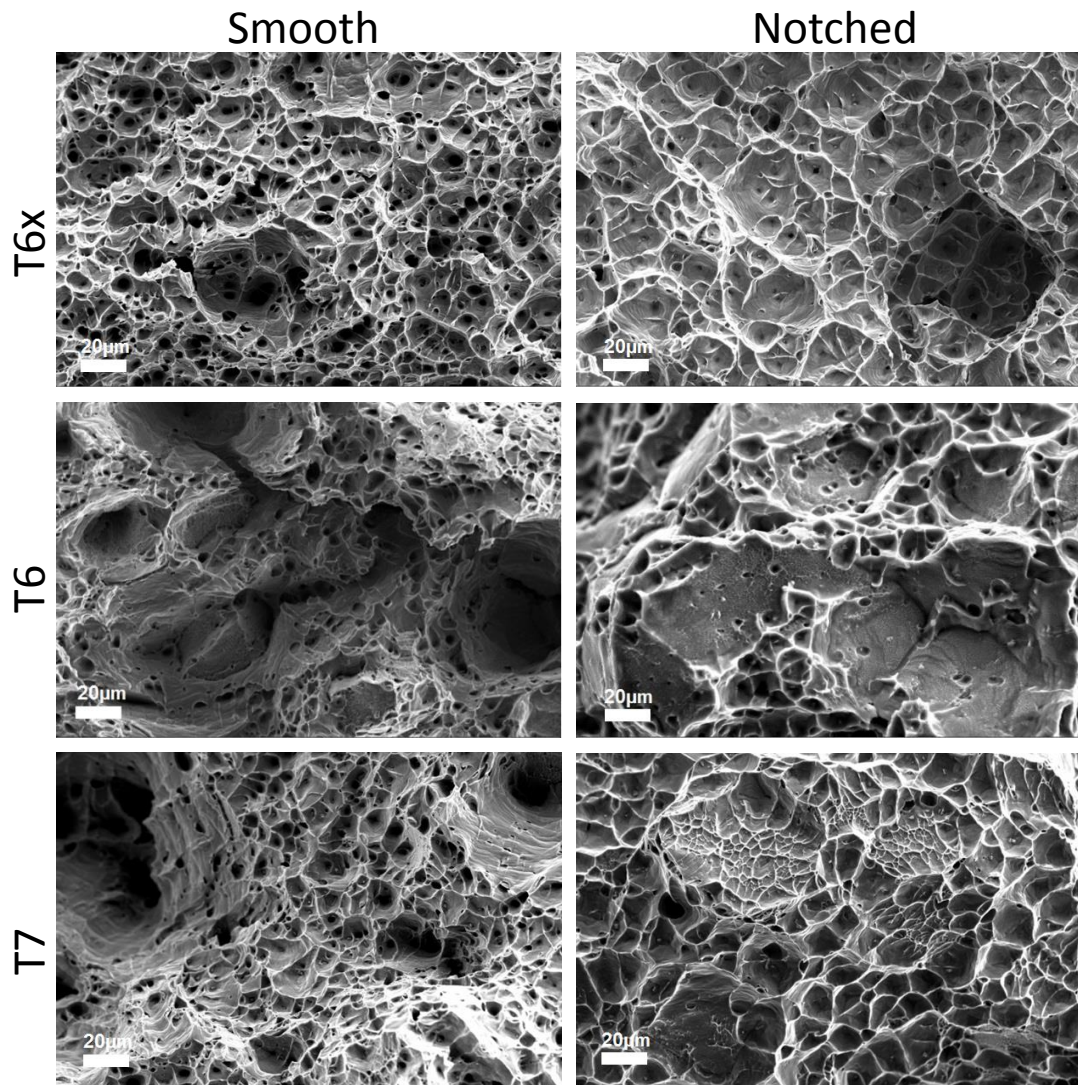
Local fracture surfaces of smooth and notched EX samples.
